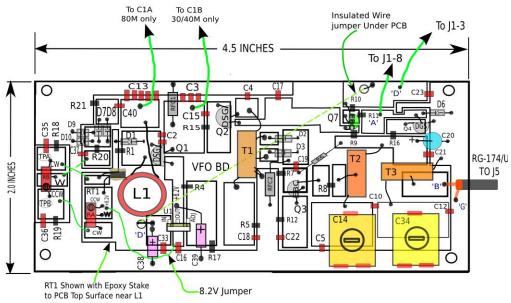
VFO Board Assembly Drawing. (Scale to Dimensions Shown) PROPOSED REVISION 8 LAYOUT W/ LEADED TRANSISTORS & DIODES
